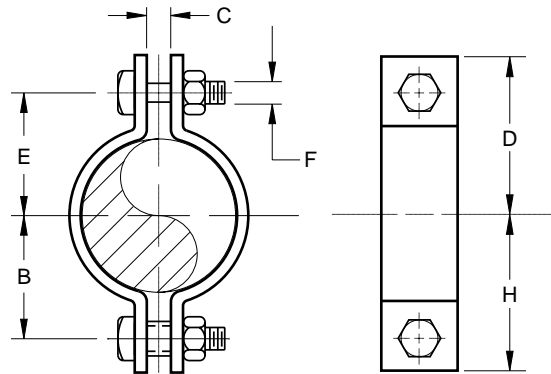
HEAVY DUTY TWO BOLT PIPE CLAMP
